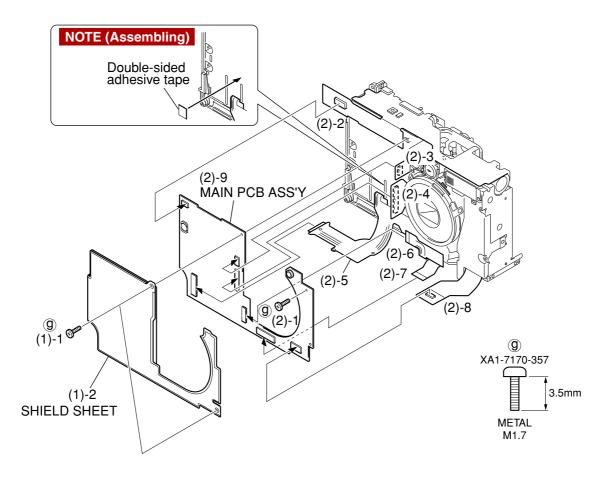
SHIELD SHEET, MAIN PCB ASS'Y
